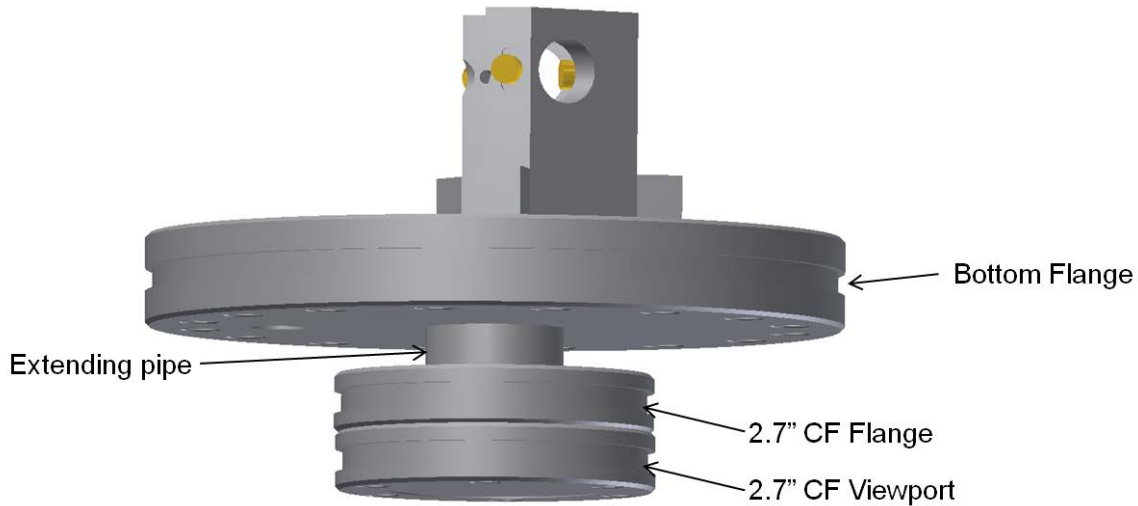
The custom bottom flange for the vacuum chamber showing the extending pipe welded between the bottom flange and a 2.75" CF flange and a viewport subsequently attached to the flange.
